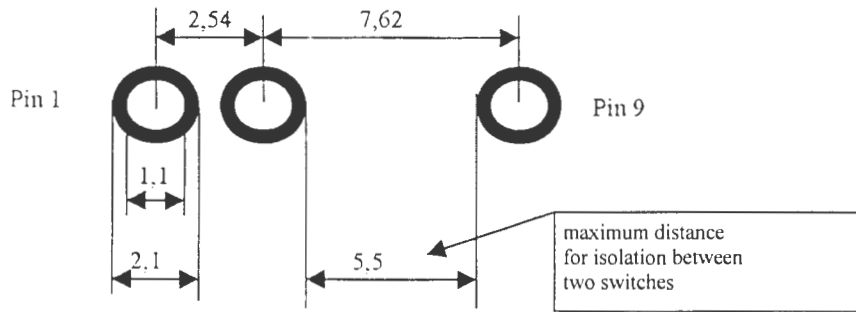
Measurements in [mm] for solder pads (as a proposal for the design) and solder pad gaps (partial drawing)
